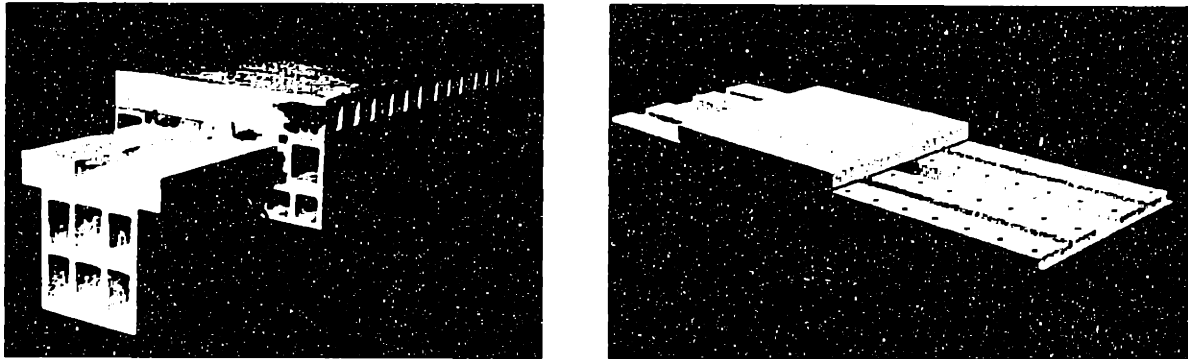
Photographs of two ceramic machine tool axis prototypes with self-compensated, water-hydrostatic bearings designed at M.I.T. (left) and Devitt Machinery (right).
